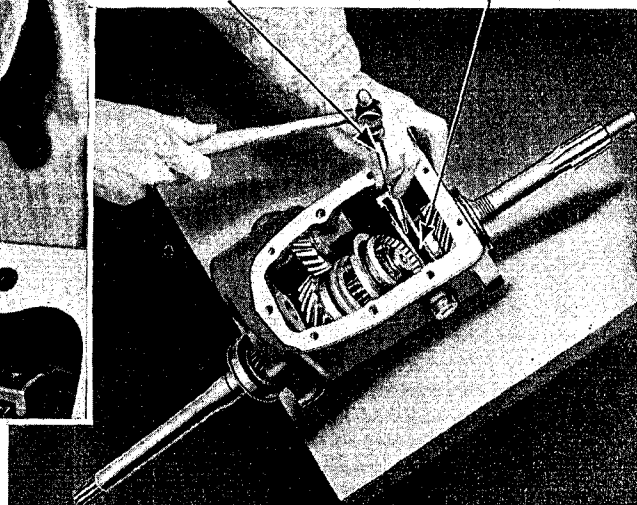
Removal of Pin for High and Intermediate Shifter Shaft
